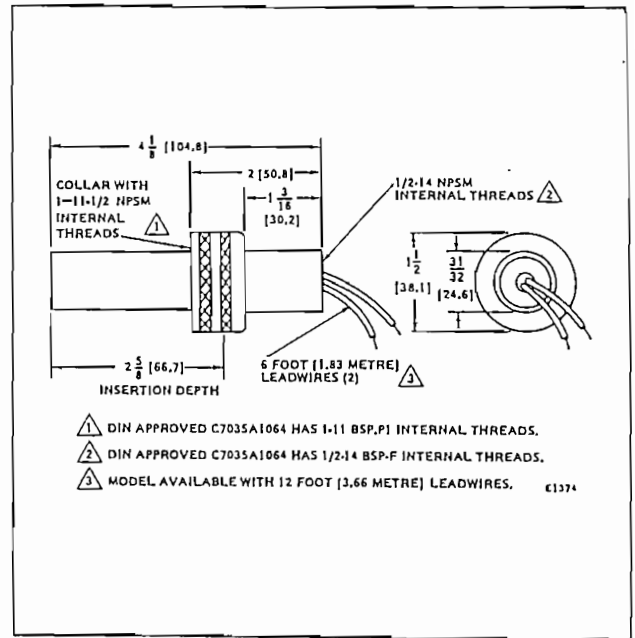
INSTALLATION DIMENSIONS OF THE C7035A, IN in. [mm IN BRACKETS].
